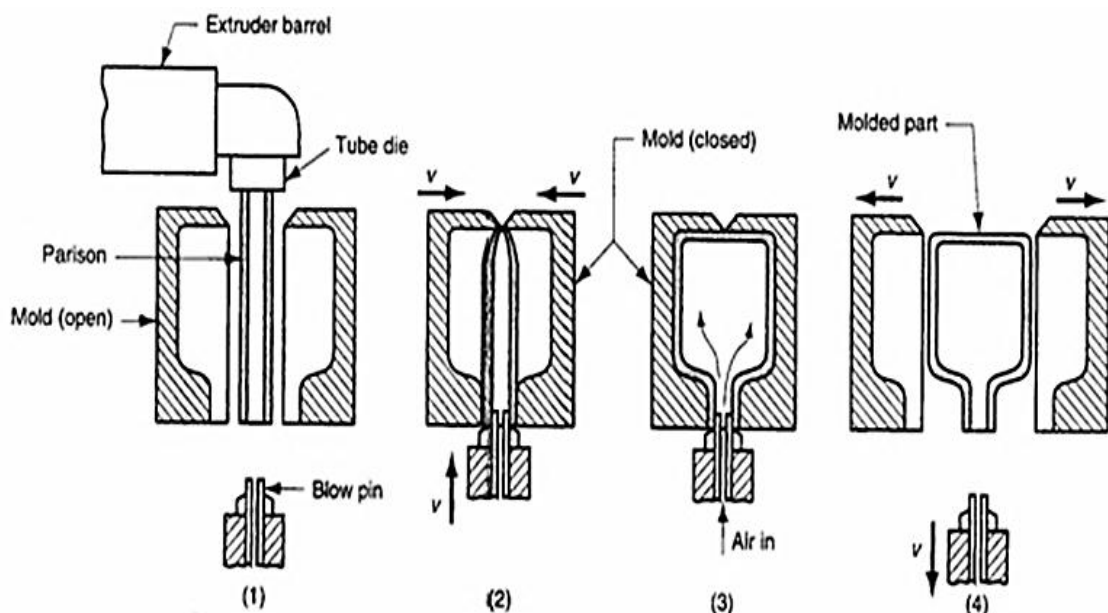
Extrusion blow moulding process. (Source: Sinotech)
